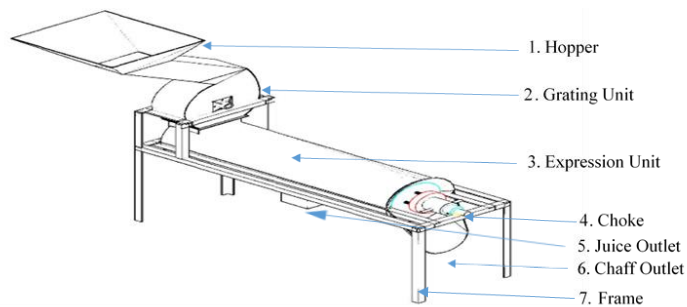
Isometric view of the motorized multi-tasks ginger juice expression machine.
